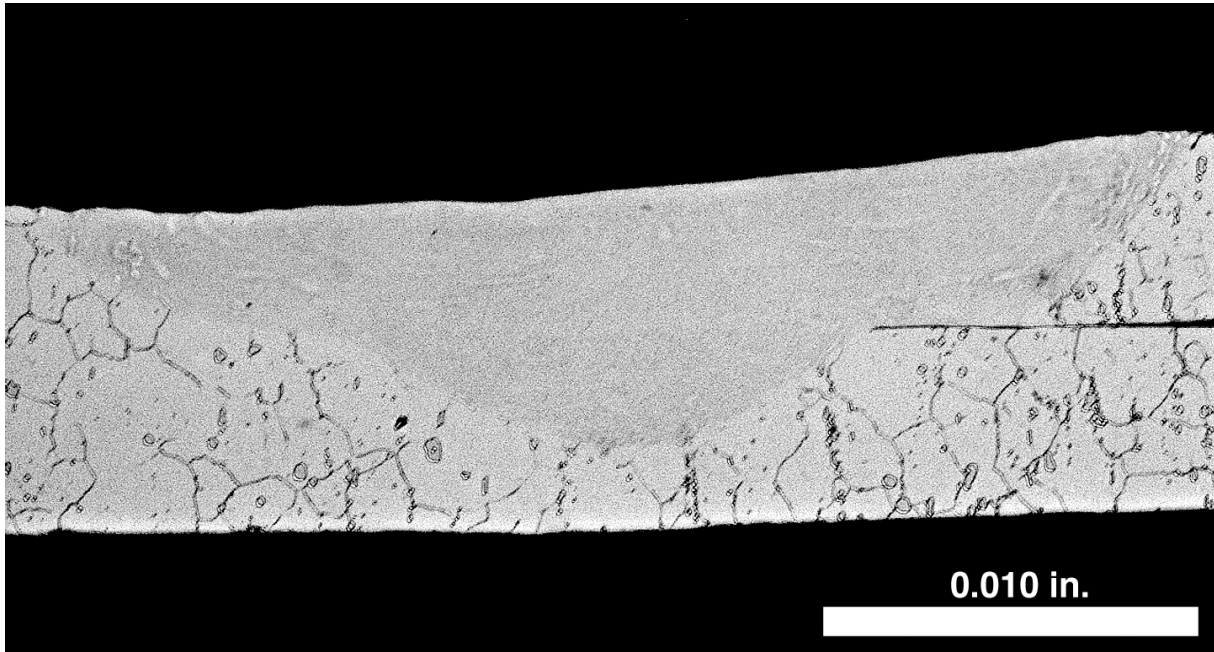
Test laser weld using a Haynes 230 0.010-in. thick coupon with a lap joint.
